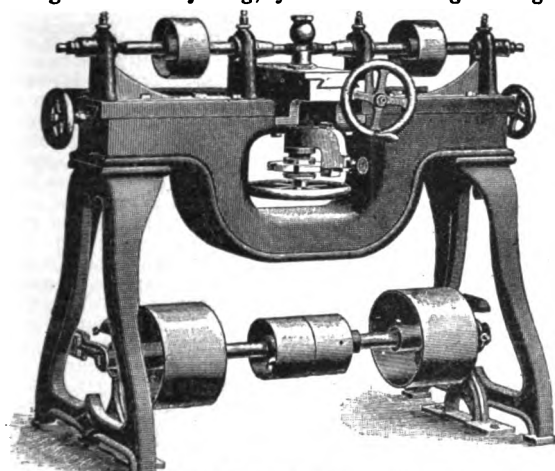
NO. 1 VALVE MILLING MACHINE.
